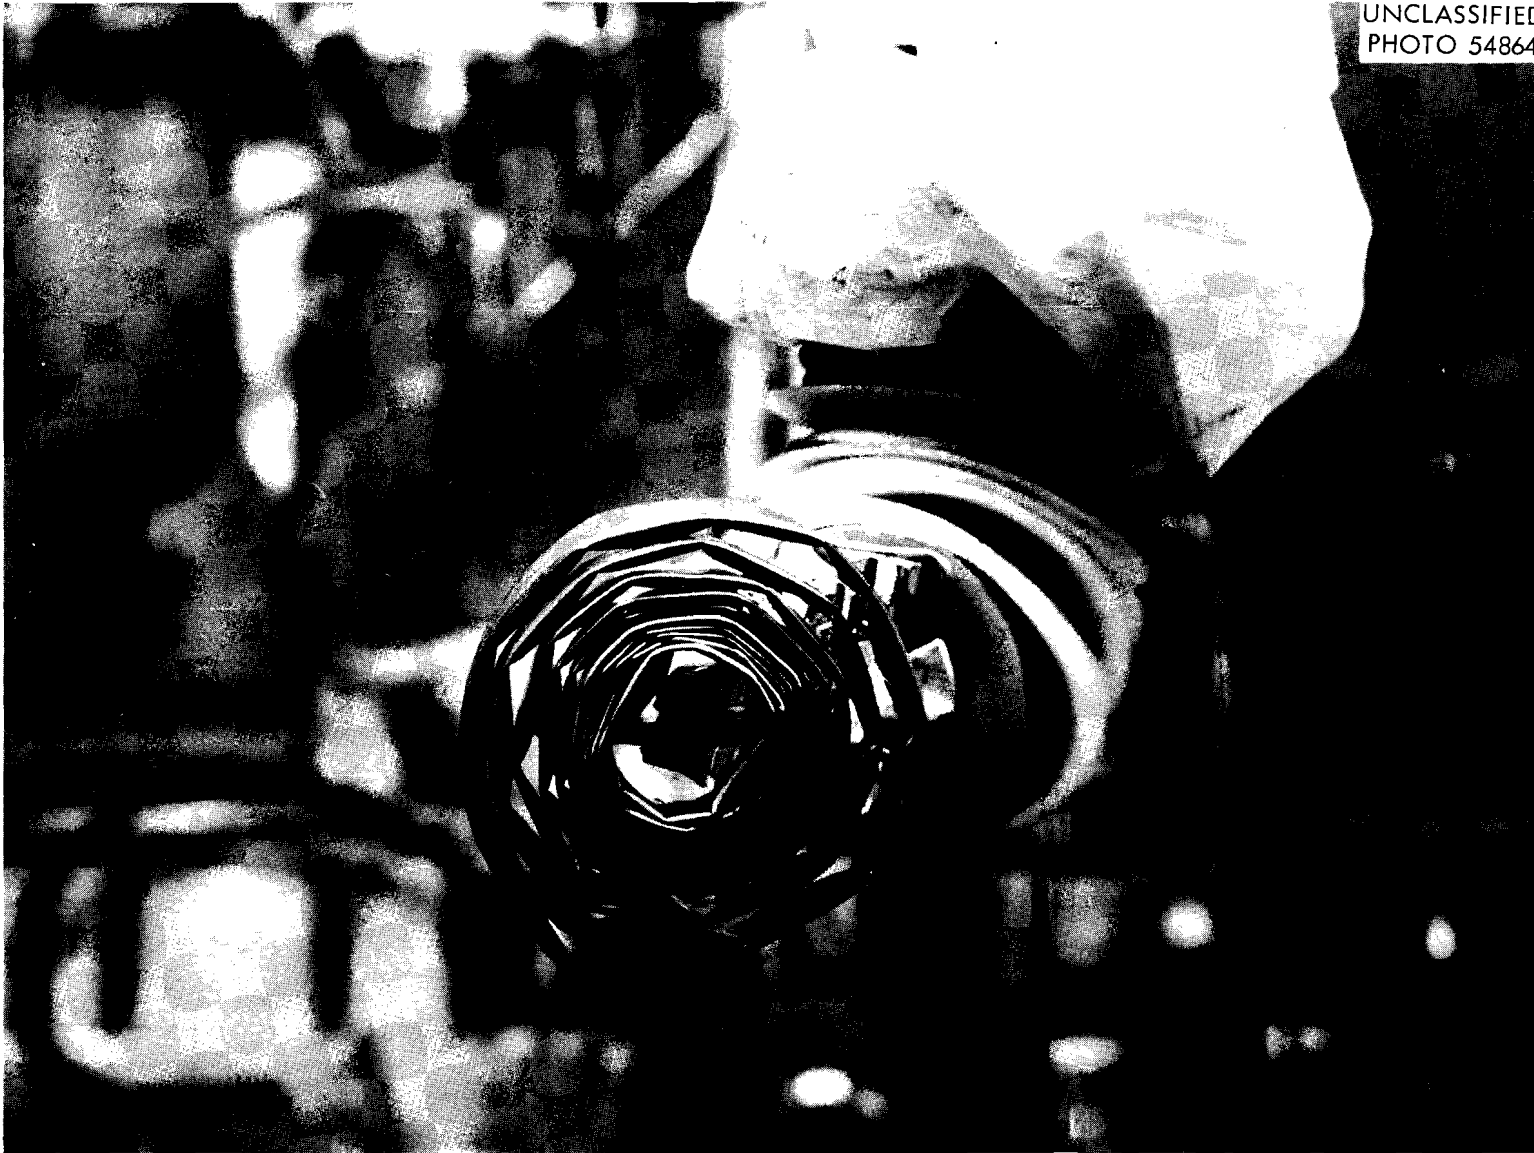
Flattened and coiled stainless steel jacket approximately 8 in. diameter. Note: crumpling and spring back of tubular jacket indicating embrittlement.
